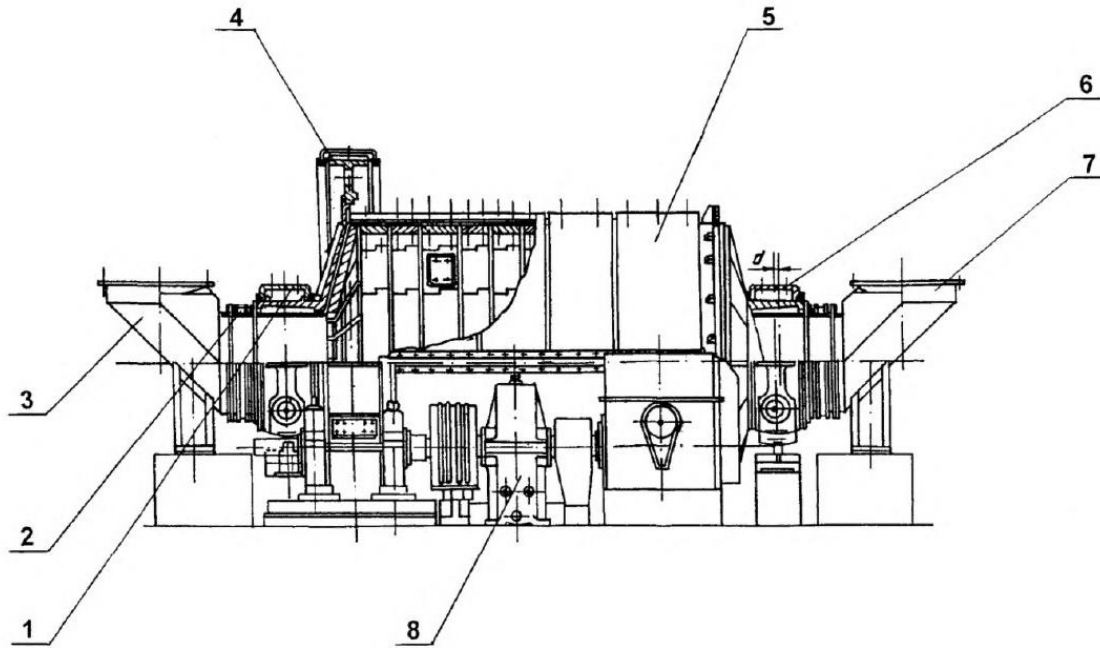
Sketch of a ball drum mill (Author's contribution): 1, 6 – bearings, 2 – pipe seal, 3, 7 – pipe, 4 – gear ring, 5 – drum, 8 – drive
